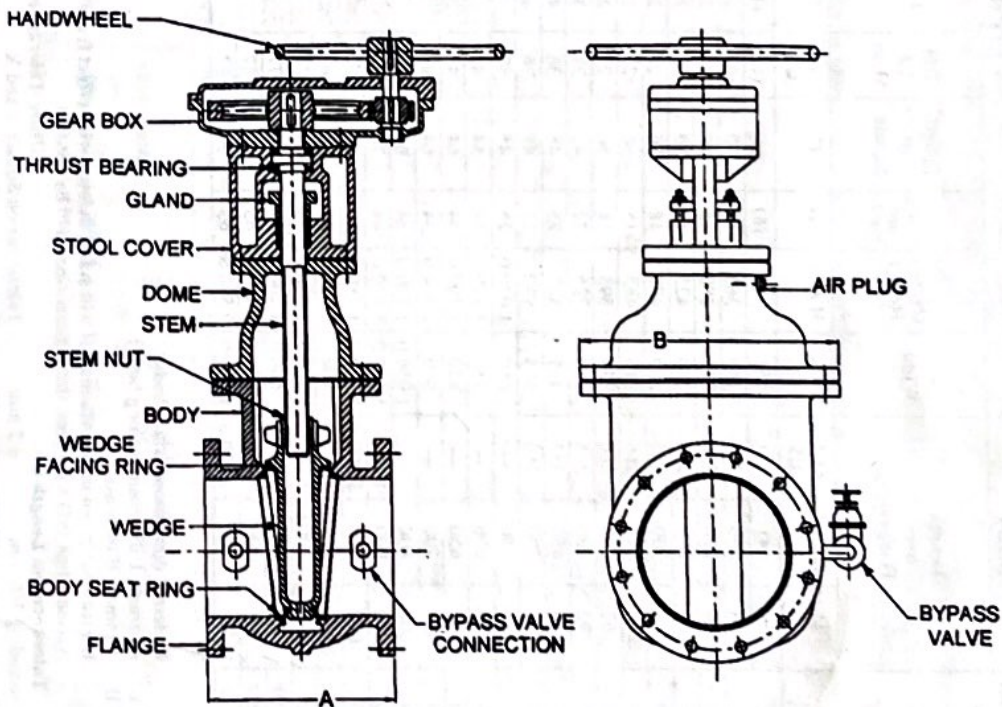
C TYPICAL SKETCH OF A SLUICE VALVE WITH BALL THRUST BEARING AND SPUR GEAR ARRANGEMENT
